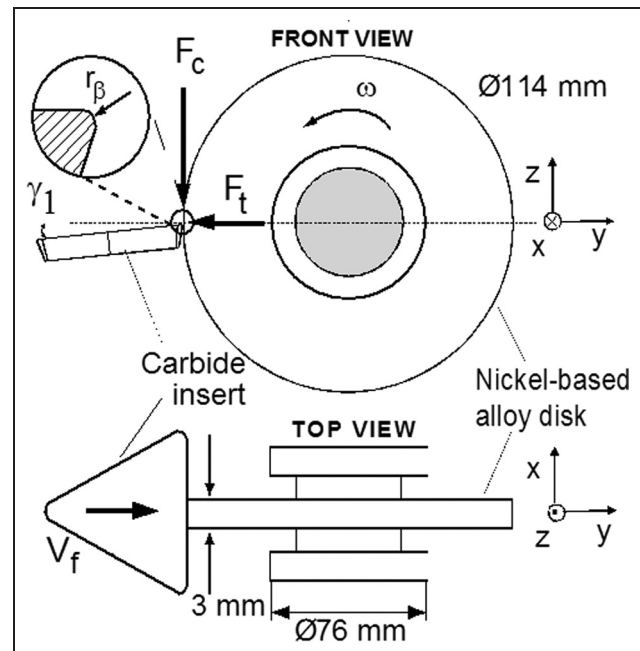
Orthogonal cutting of a nickel-based super alloy workpiece specimens.
